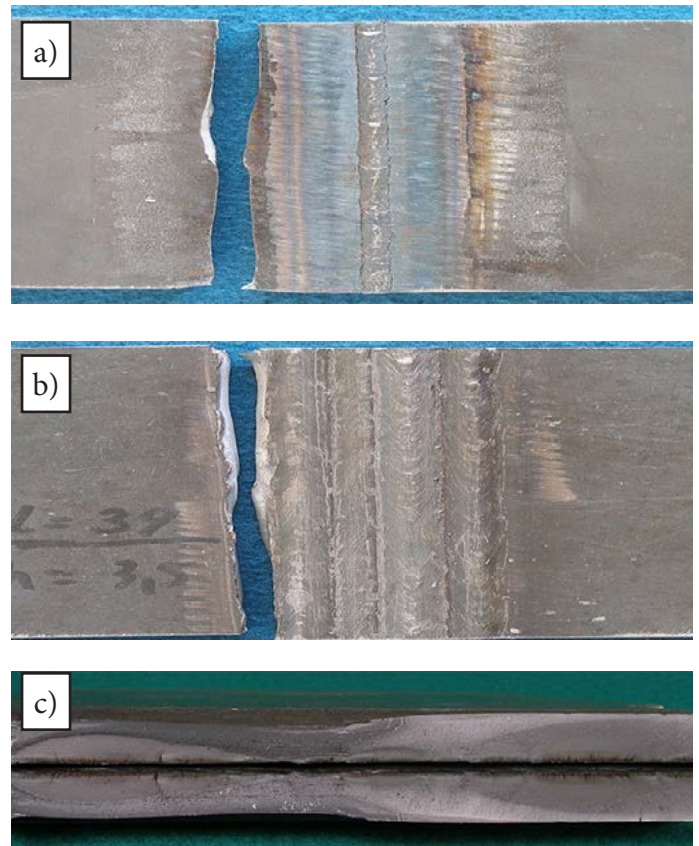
Exemplary fatigue fracture initiation in the interface between the butt weld face and the base material (specimen no. 3 of series III): a) view from the root side, b) view from the face side, c) fatigue fracture
